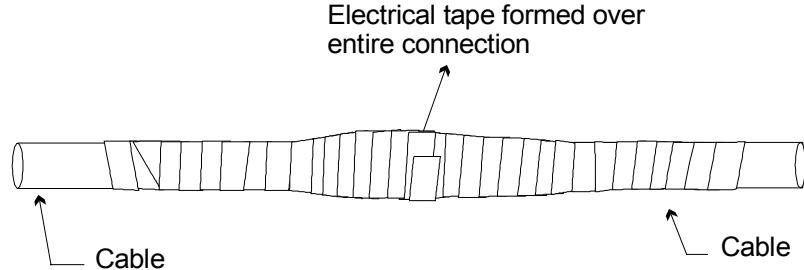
Electrical tape wrapped tightly against cable jacket, typical both ends
